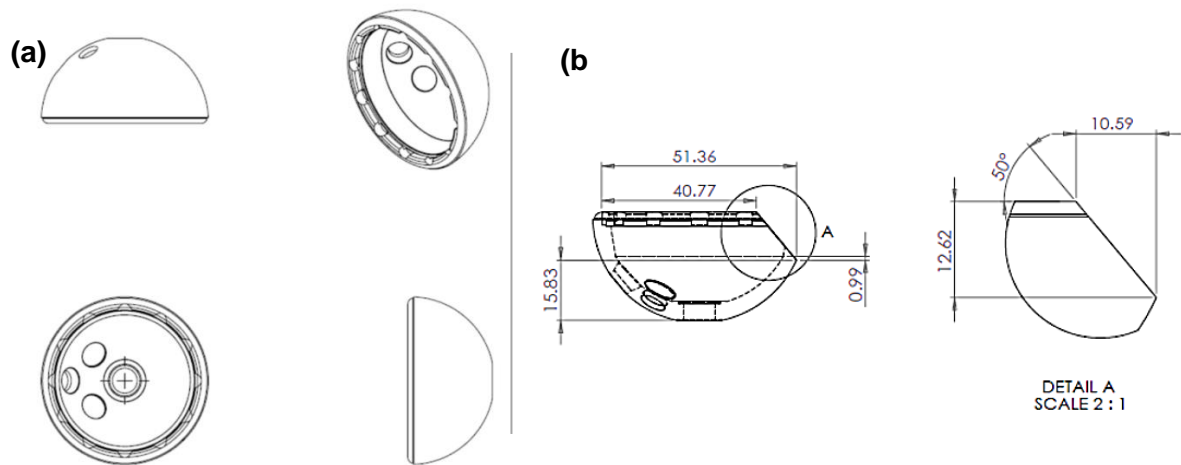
(a) Unmodified acetabular shell (b) Details showing sectioning features
